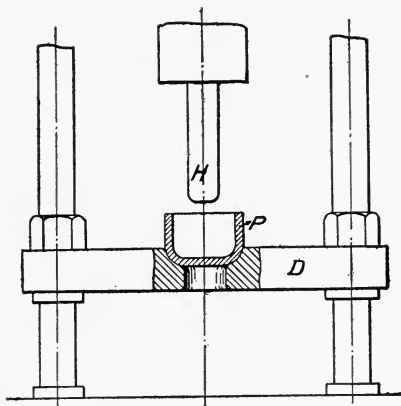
Making Hot-Drawn Tubes. Re-Drawing Cupped Discs.
